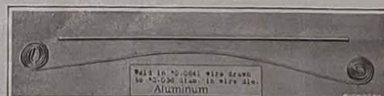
Sample of aluminum wire welded and drawn through a die without disintegrating the joint.
